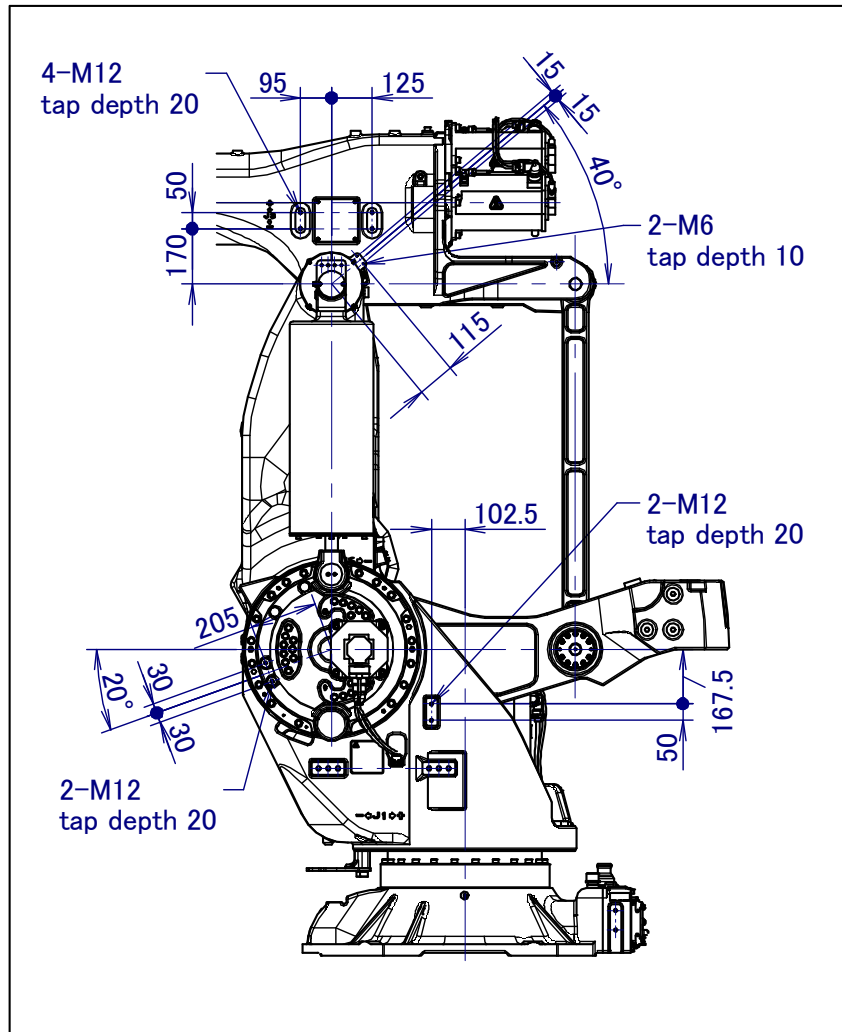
(b) Equipment mounting faces (M-900iB/700/700E) (2/2)
